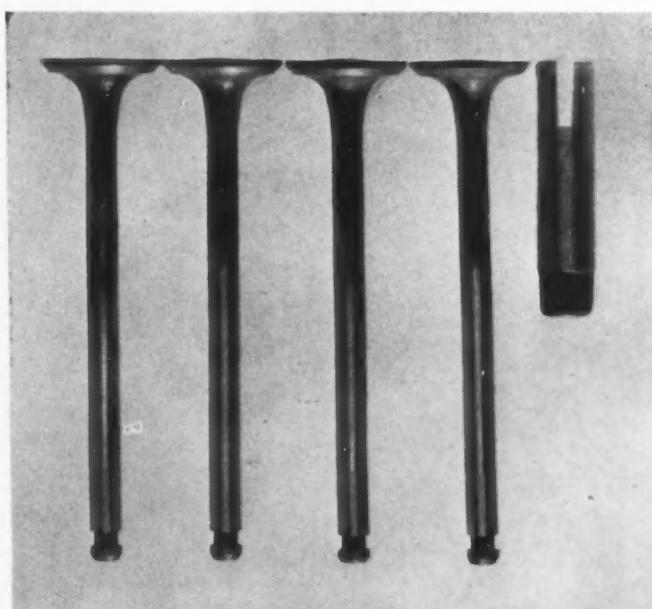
A Slotted Valve-Guide Permits the Deposit on the Valve Stem To Be Sheared Off and Prevents Sticking
